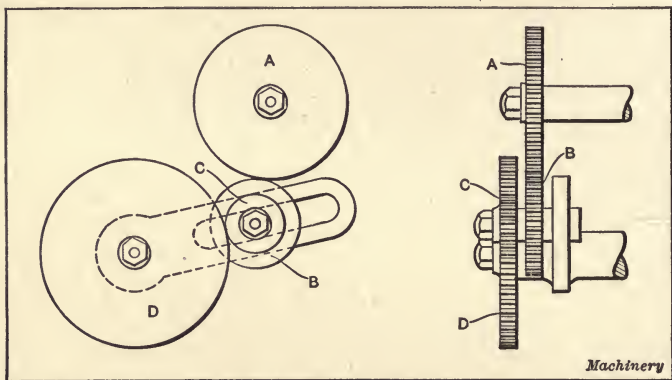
Compound Gearing for Machine shown in Fig. 3
